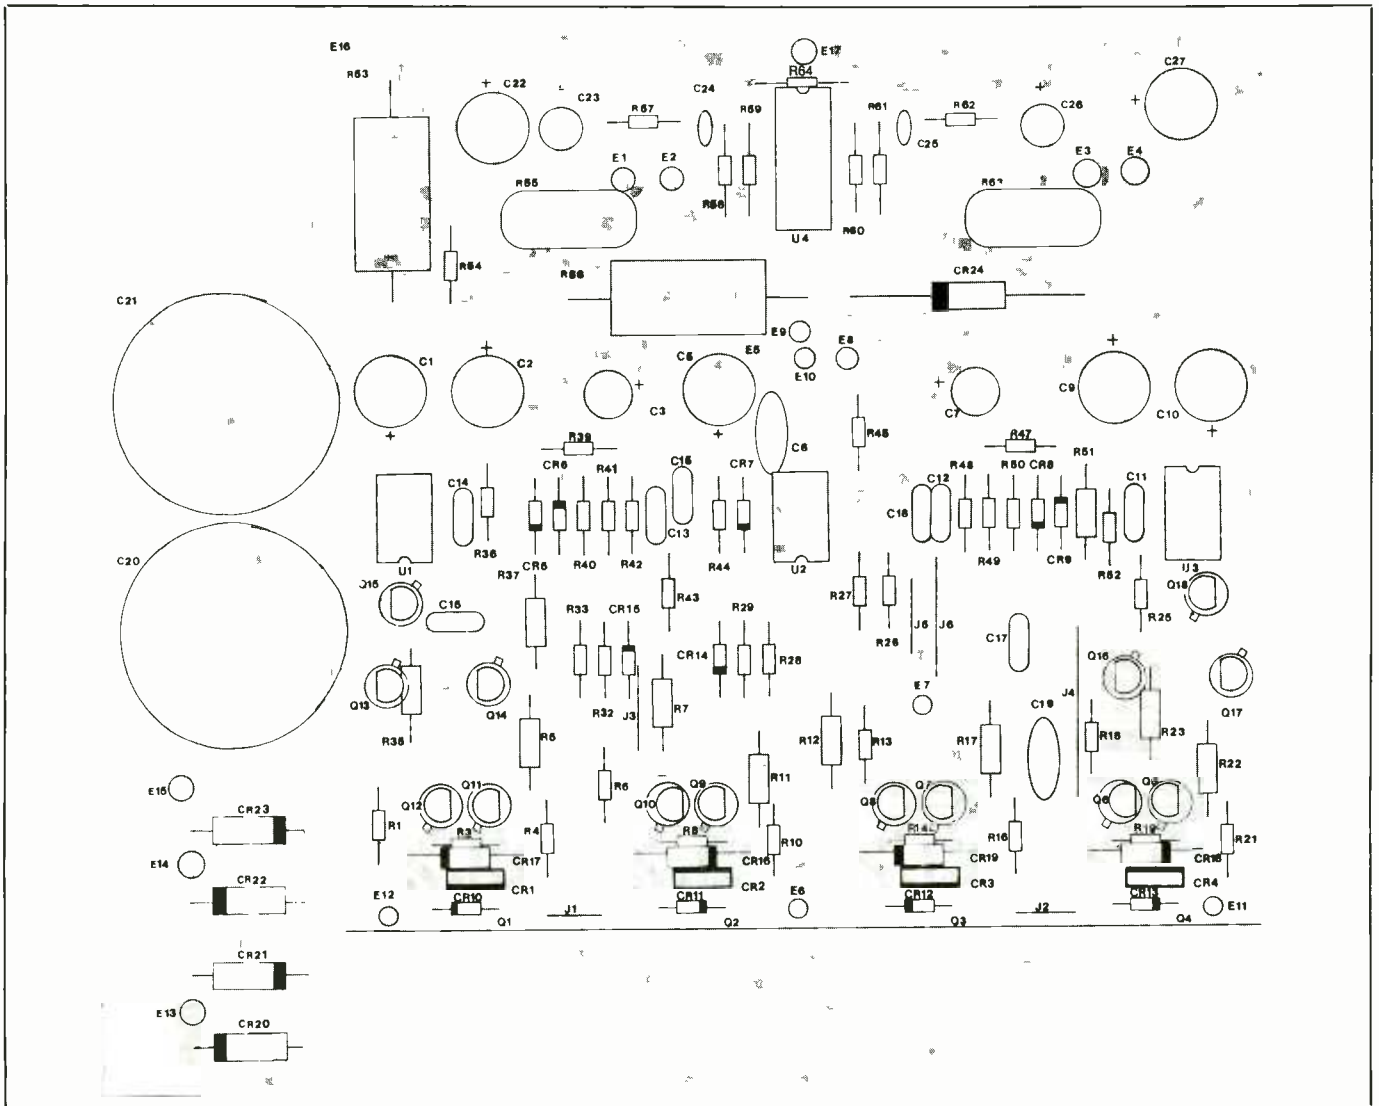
The wiring guide for the pc board. The leads of power MOSFETs Q1 through Q4 plug into holes in the board but these transistors are physically mounted on a heat sink that is itself mounted on the board.
